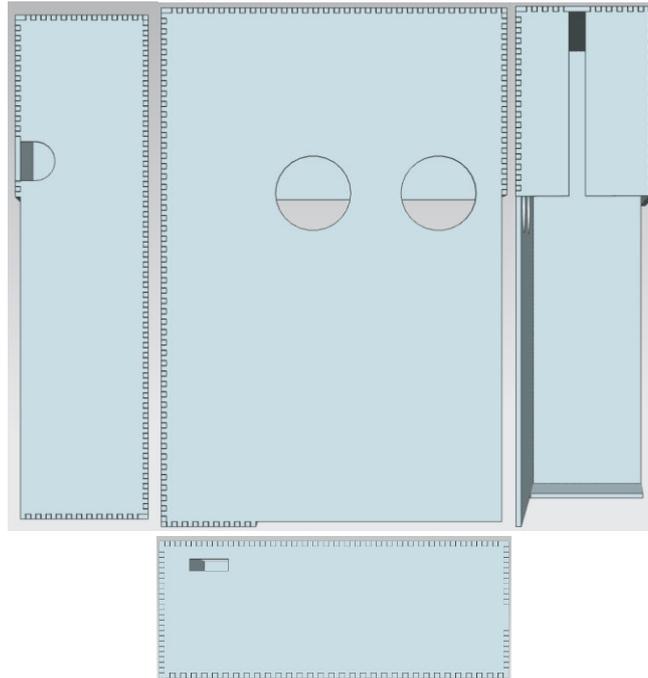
Left hand, front, right hand and top view of the cover of the scent module (from left to right, top to bottom)
